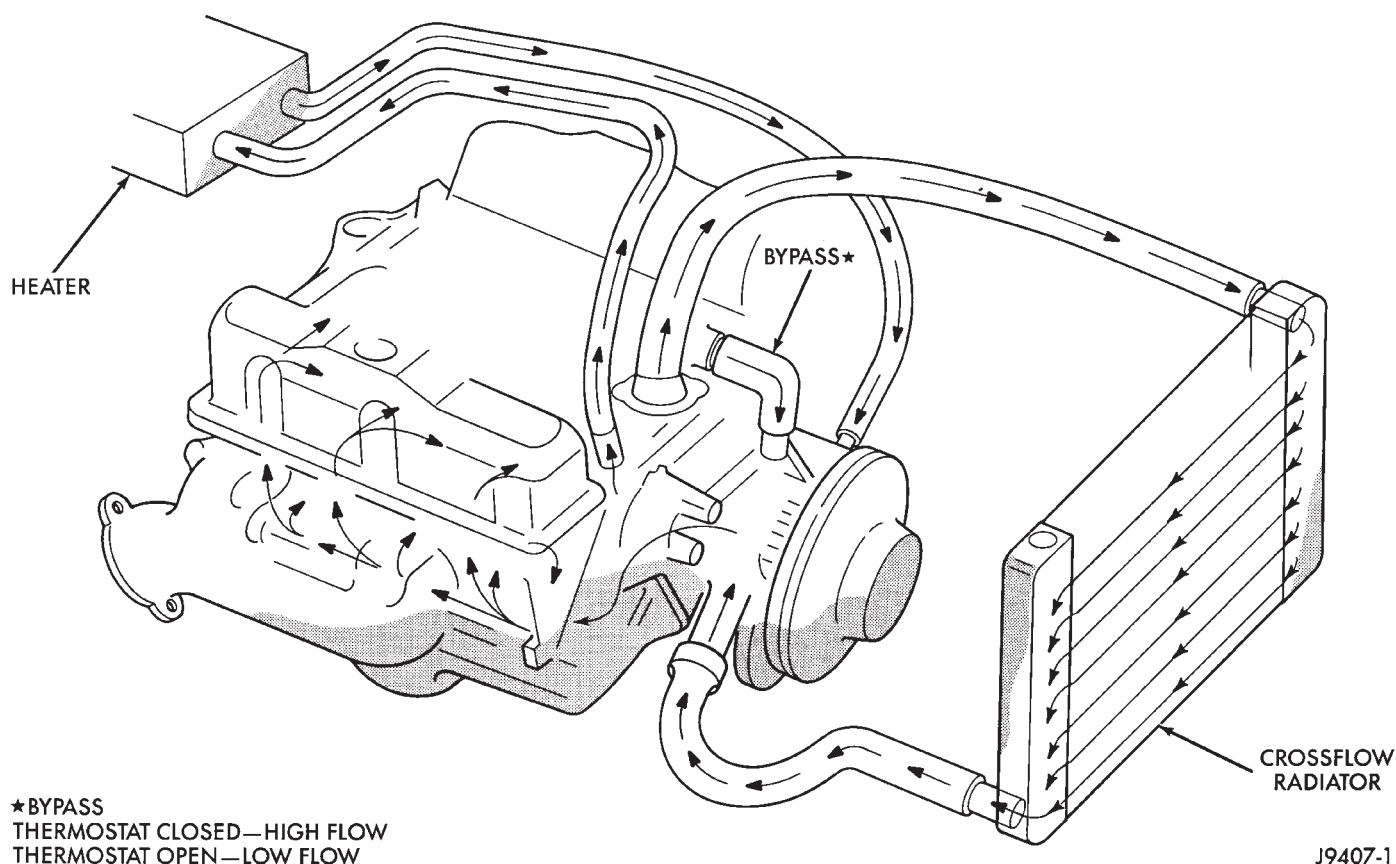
Engine Cooling System—3.9L/5.2L/5.9L Engines—Typical
